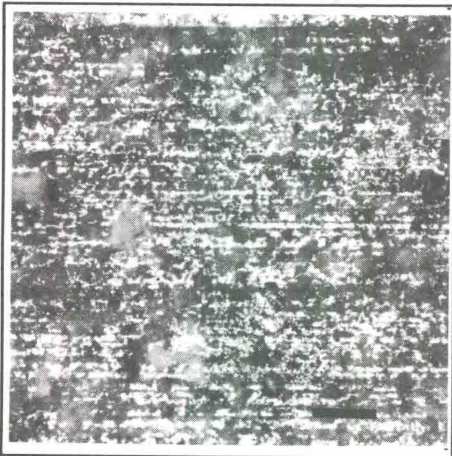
Machining grooves as a result of grinding the RBSN bolt. Bar = 0.1 mm.
